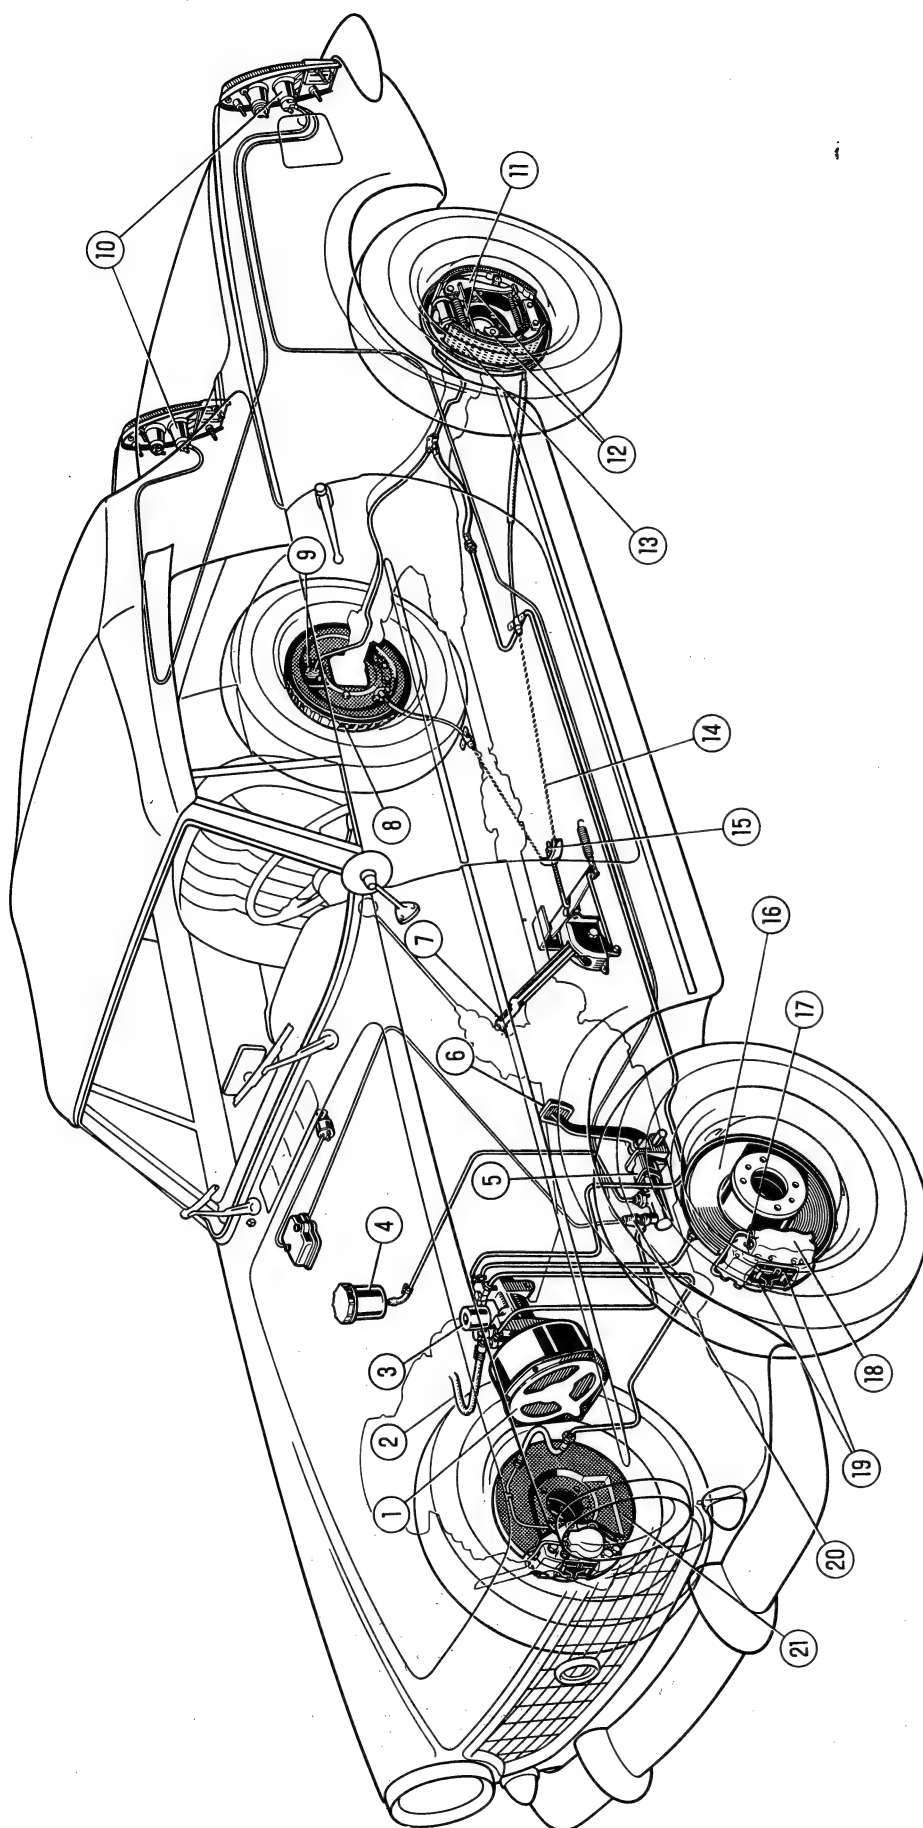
Service and parking brake system diagram - 1500 Cabriolet.
